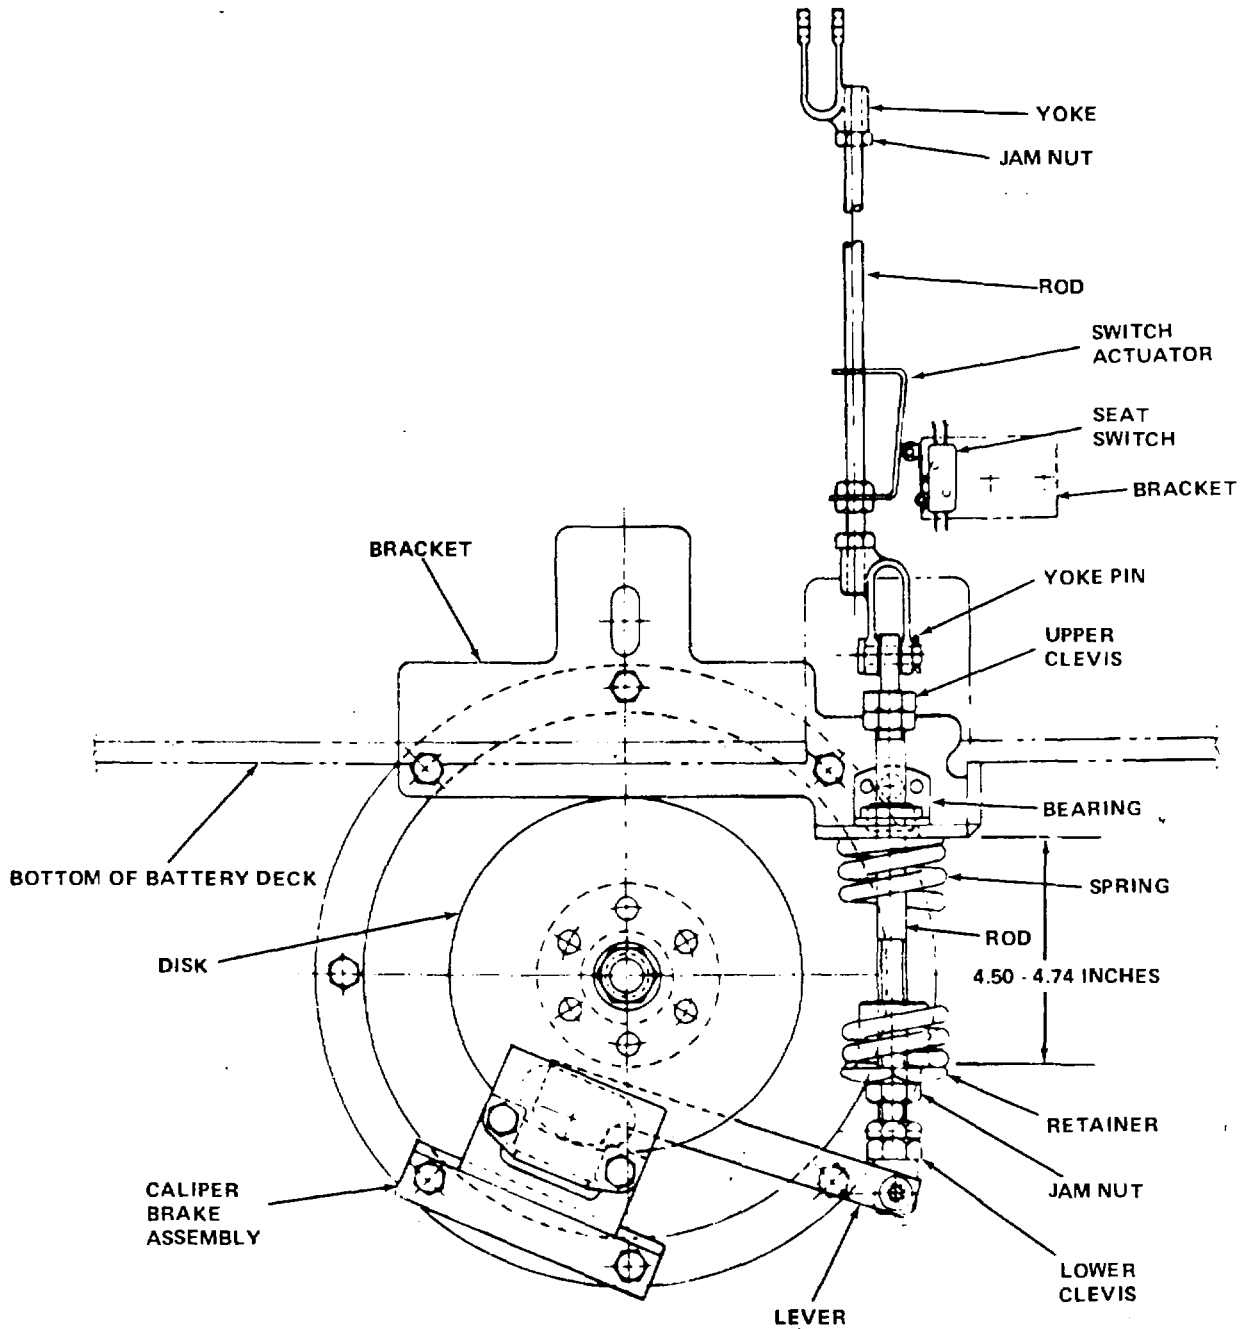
Parking brake lower linkage and capliper assembly, installed view.
